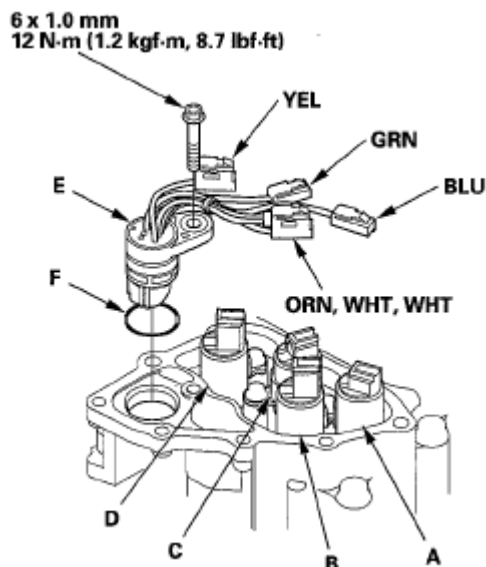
Identifying Shift Solenoid Harness Connector, Transmission Housing, O-Ring & Bolt Torque Specification
